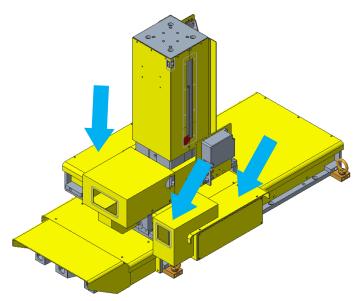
Y-axis wiring replace (HJ300, HJ320, HJ325, HJ335, HJ340)
